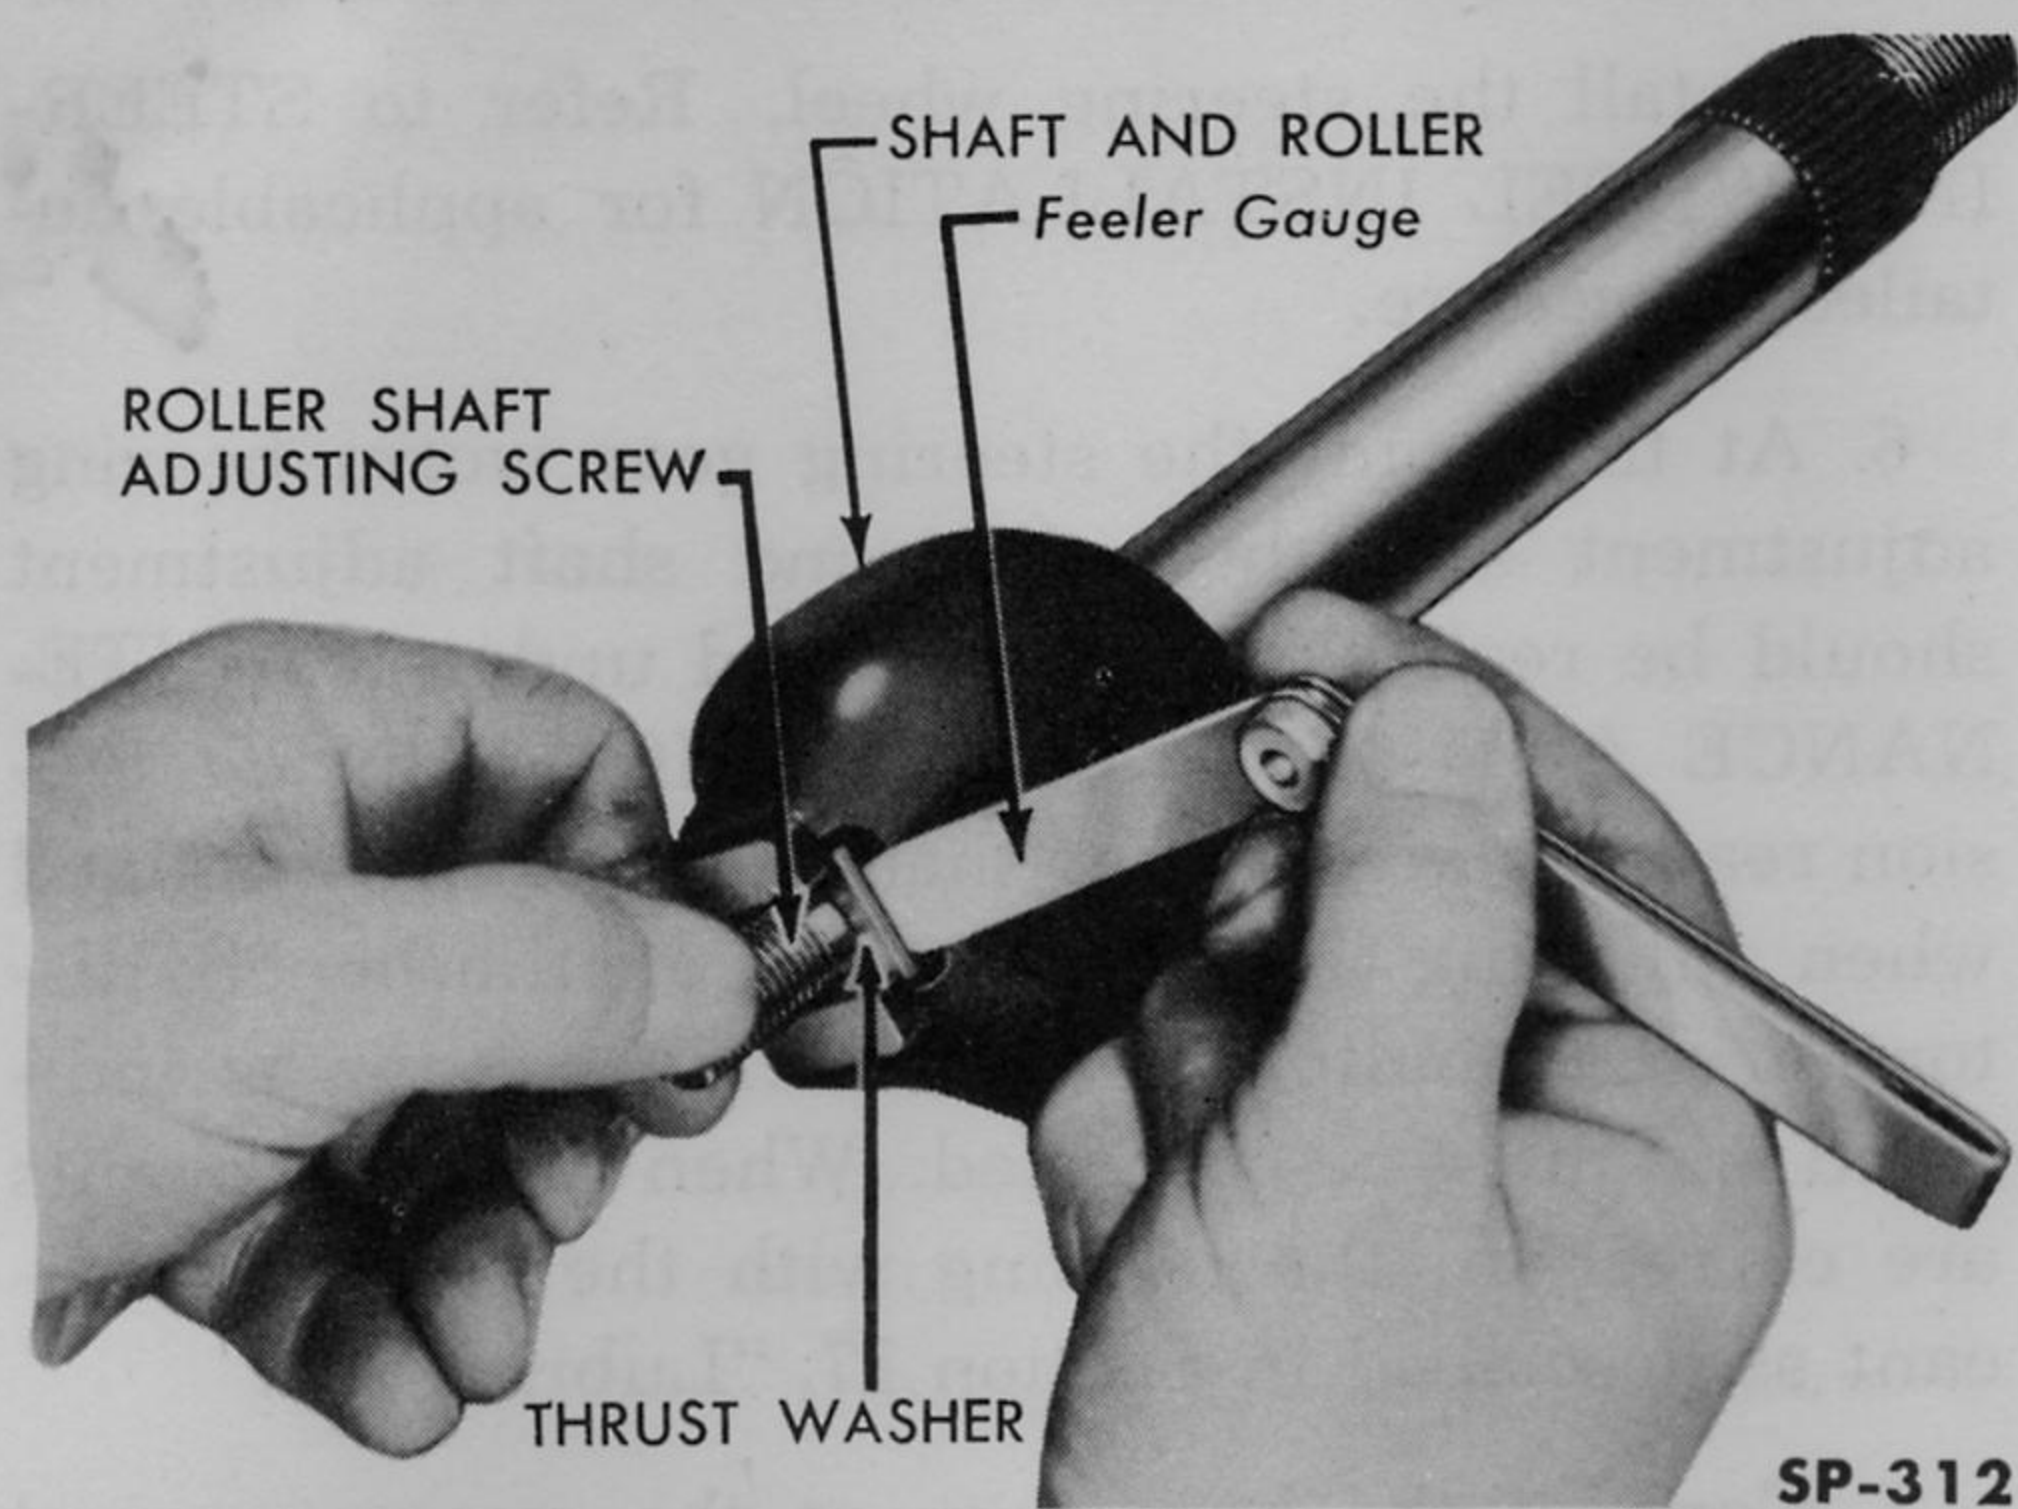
Checking Roller Shaft Adjusting Screw Clearance
